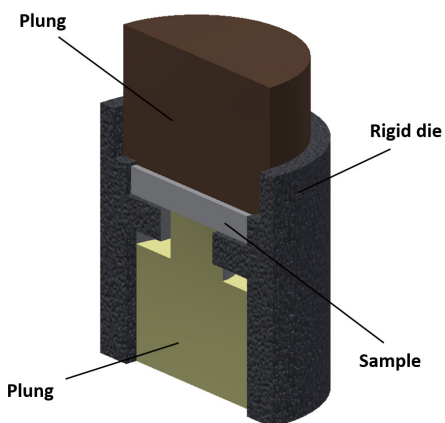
Equipment to test thin discs developed by P.W. Bridgman This device would be developed to form the basis of future HPT test machines. Adapted from [71].
